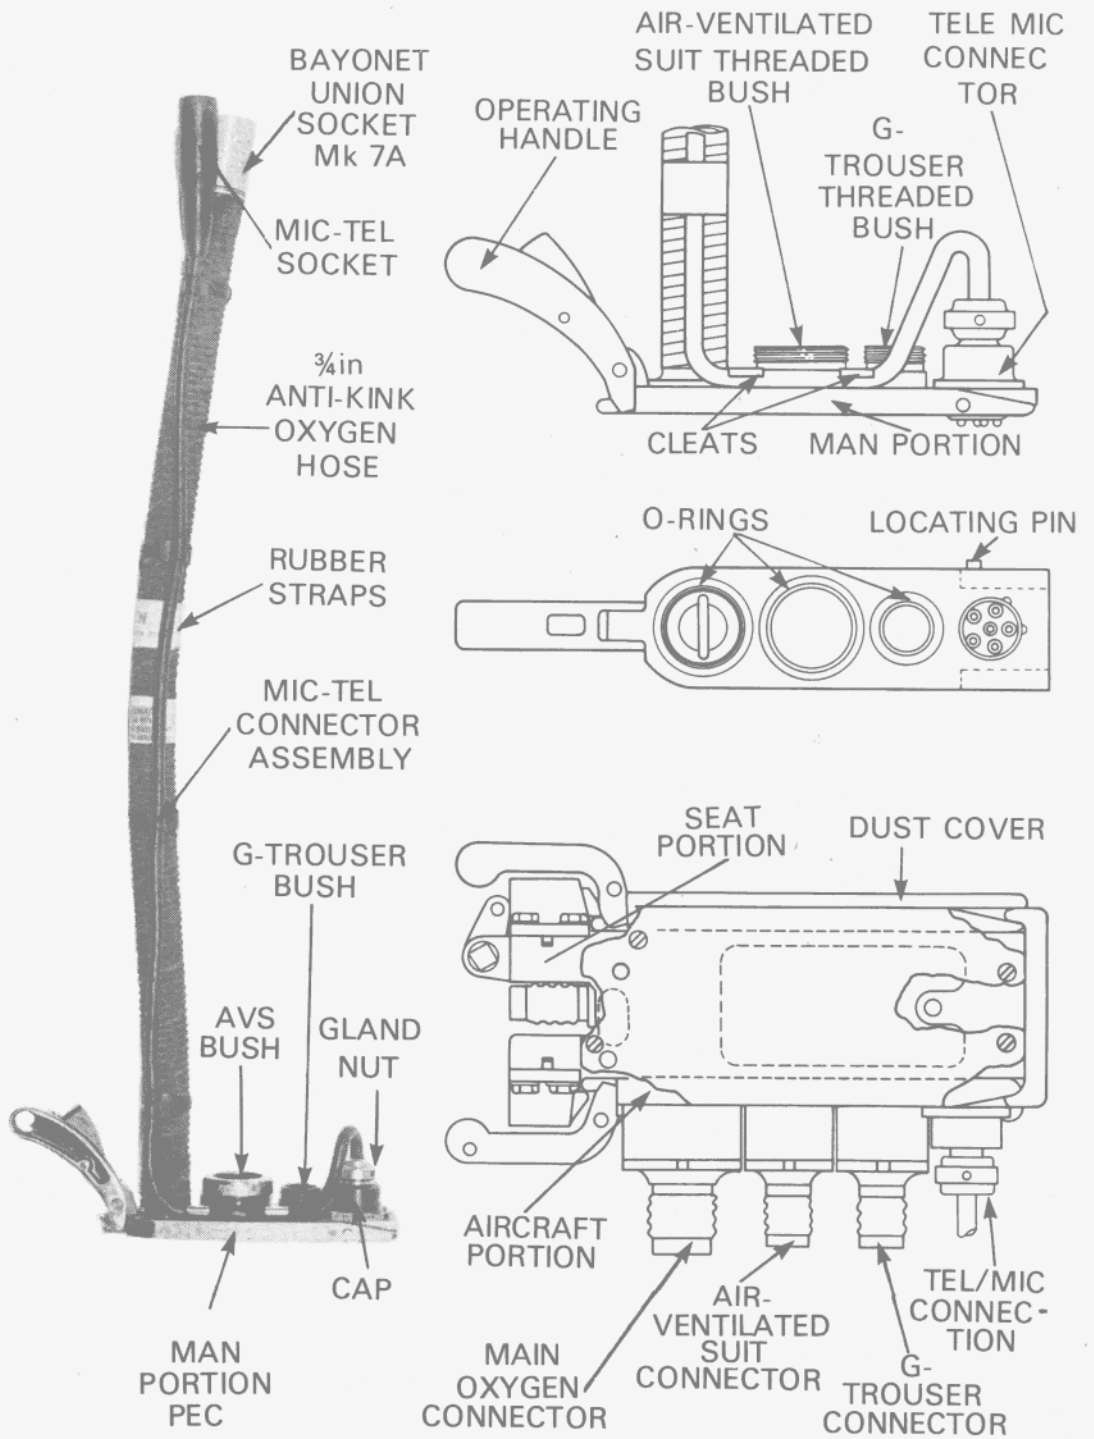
Typical PEC and Low Pressure Oxygen Mask Hose Assembly.
